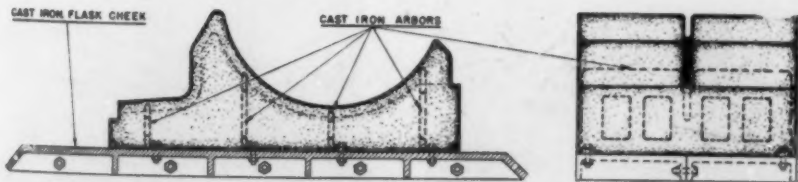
CROSS SECTION OF COMPLETED SIDE CHEEK CORE MOUNTED ON SIDE CHEEK FLASK SECTION.
